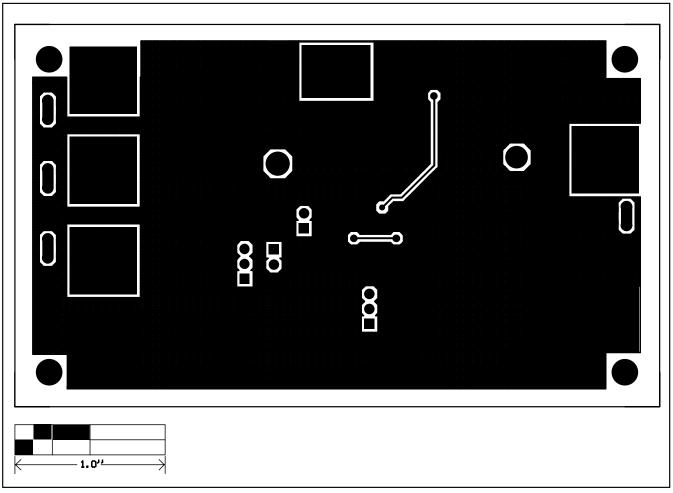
MAX6495 EV Kit PCB Layout—Solder Side
